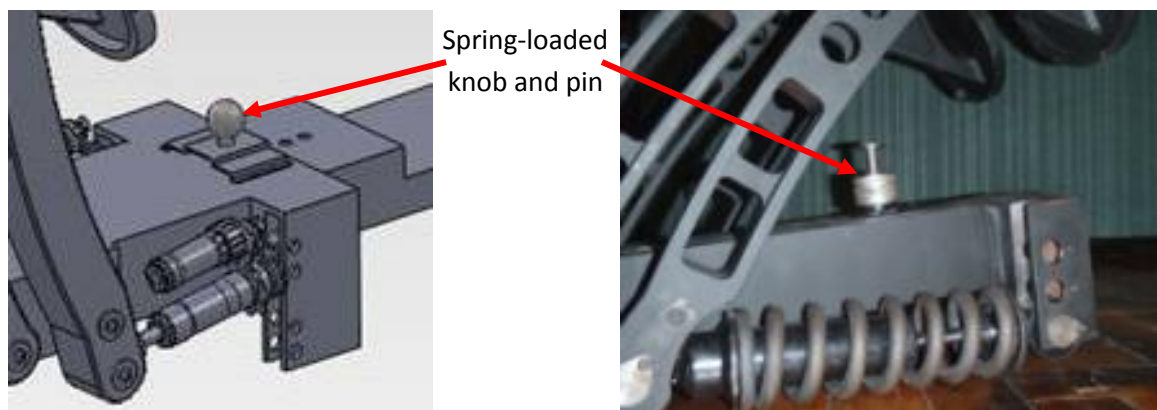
Shows the spring-loaded knob and pin detent system. The photograph on the right is the third prototype.
